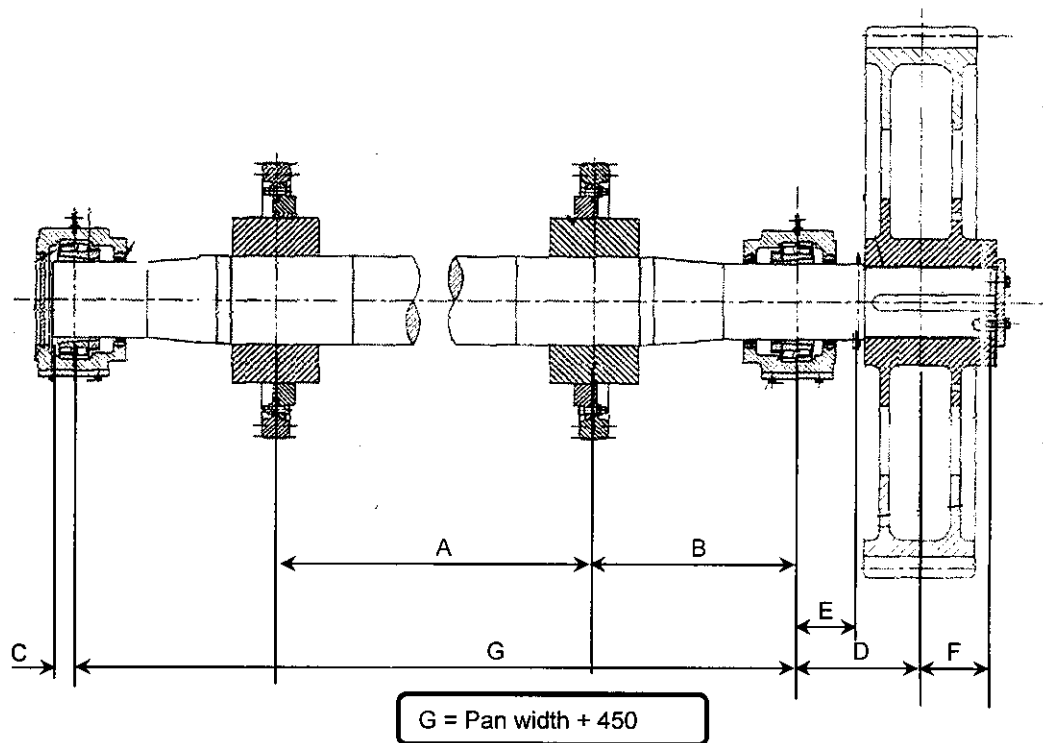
Relation for location of subassemblies in Open type Drive Wheel Assembly
